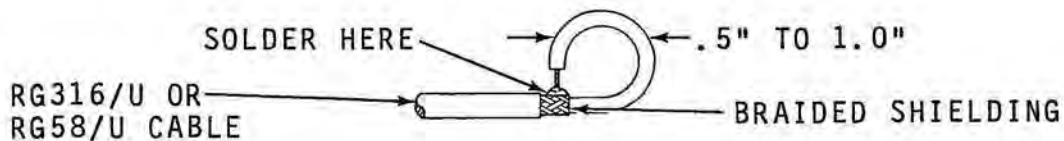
Soldering Cable Center Conductor to Braided Shielding
